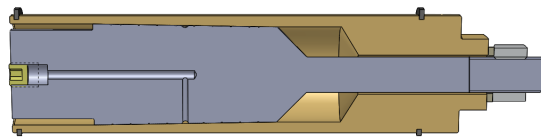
A 3D model of the expansion dowel assembly cut section
